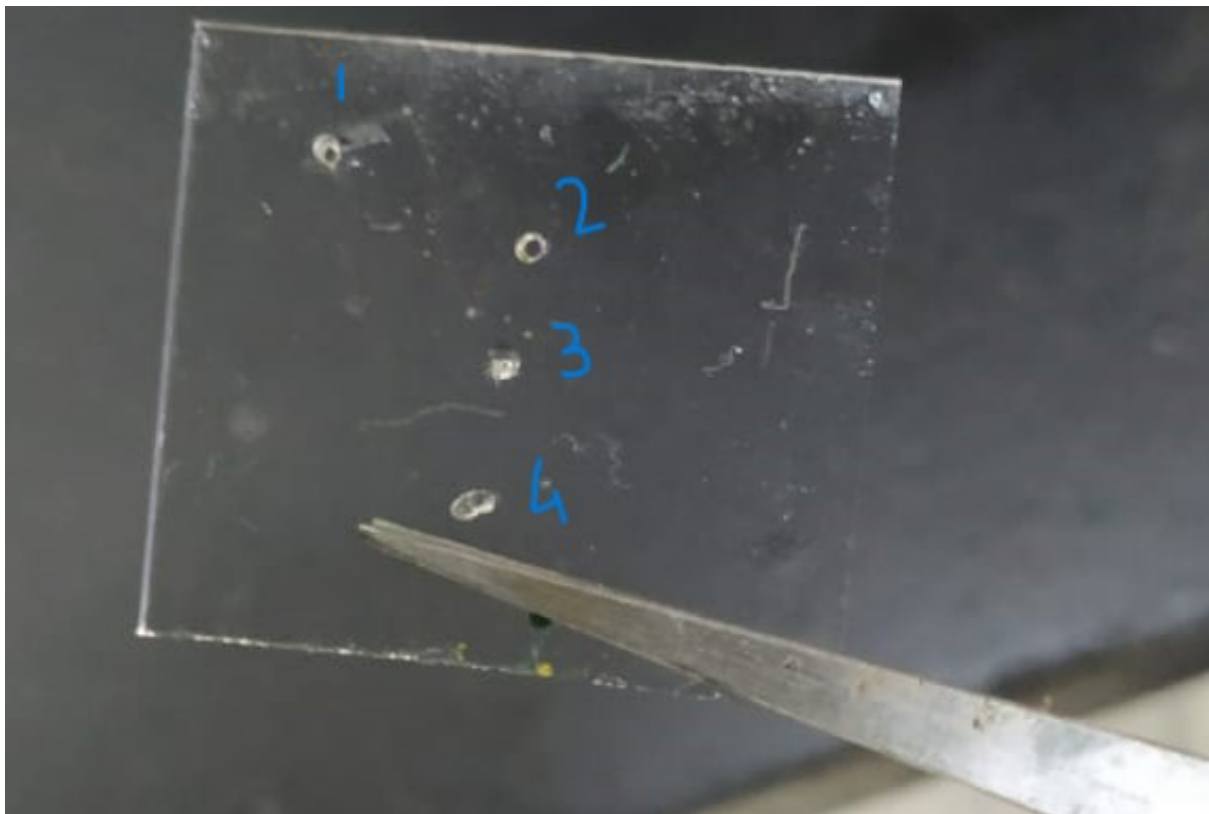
Closeup of borosilicate glass workpiece with through holes machined
